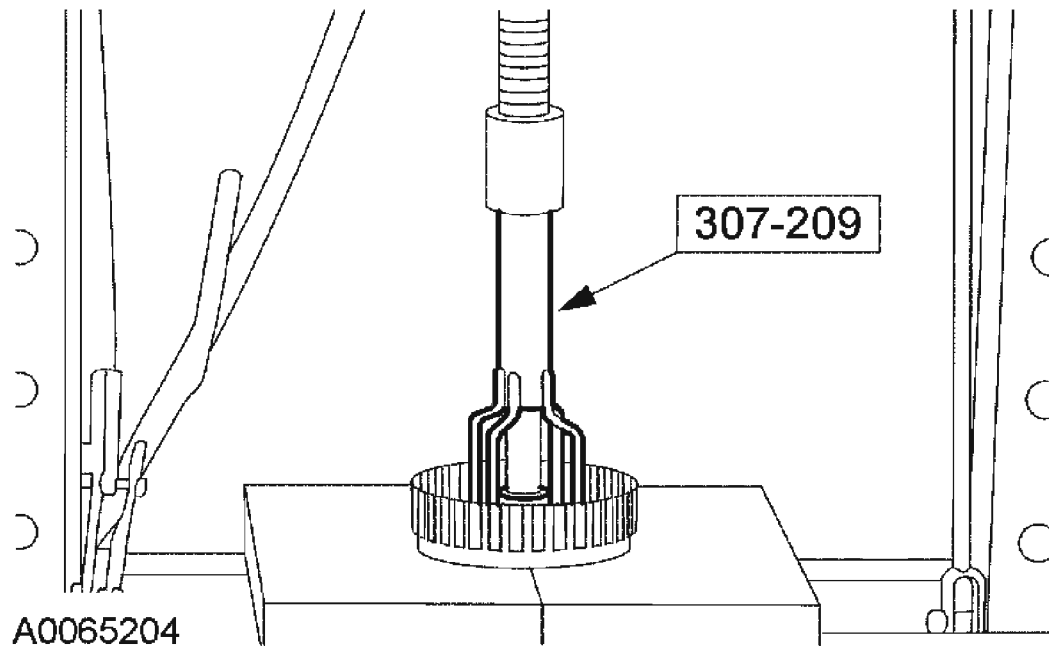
Installing Forward Clutch Assembly In A Suitable Press Using Special Tool
